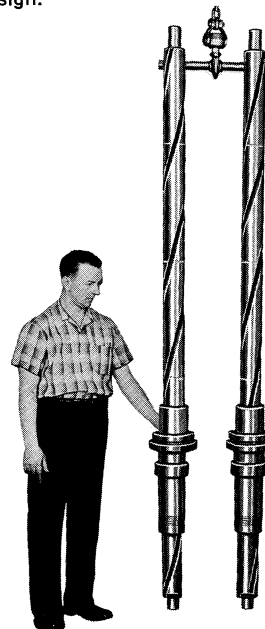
Two Red Ring 100-in. long, 3 3/4 in. diameter lead bars whose helical groove total lead accuracy is 0.0006-inch.
